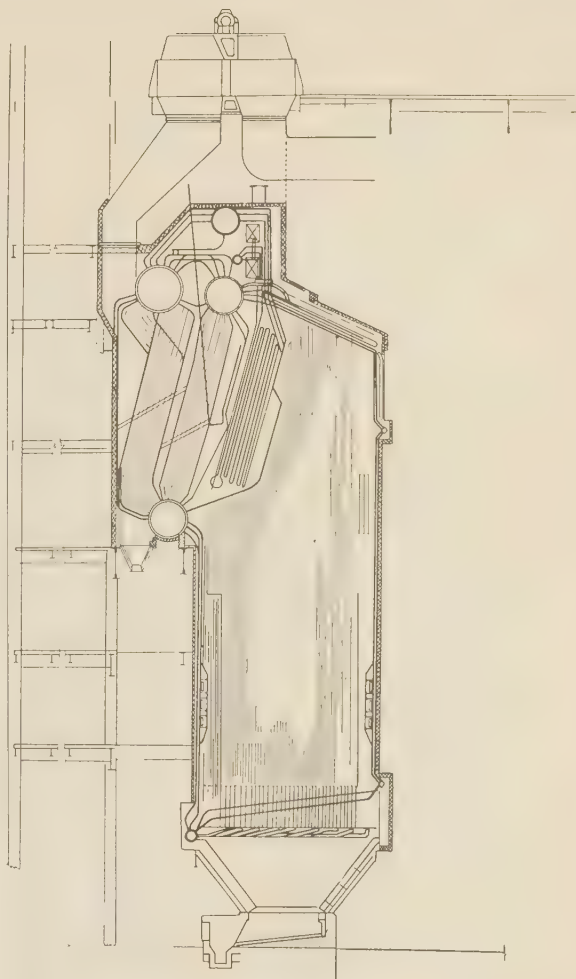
CROSS SECTION THROUGH STEAM UNIT RATED AT 400,000 LB PER HR. AT 950-PSI DRUM PRESSURE
